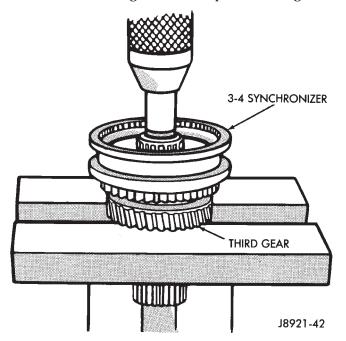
Remove 3-4 Synchronizer And Third Gear
